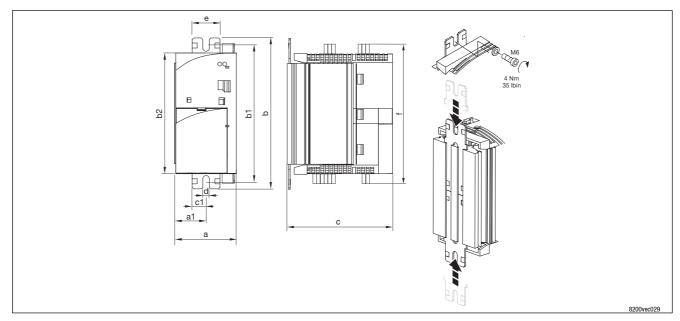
Dimensions for mounting in "Cold plate" technique 0.25 ... 2.2 kW
